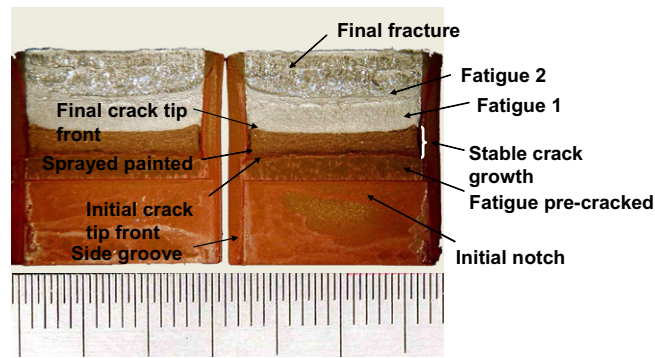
Crack front visualization in a tested fracture toughness specimen.
